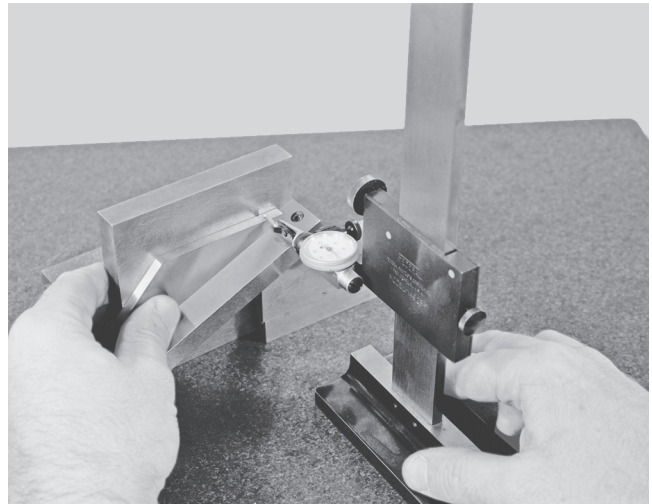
Setting the test indicator to zero at the end of the workpiece.
